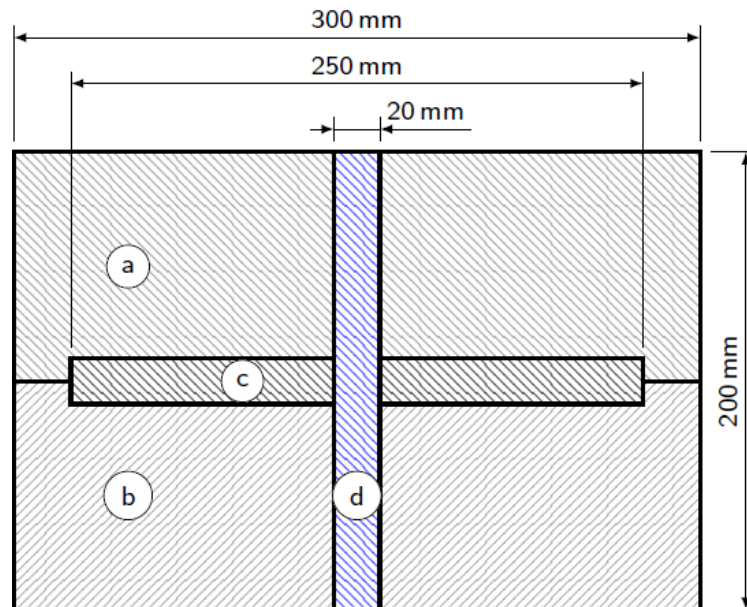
Schematic drawing of the joining partners (a and b) with indicated weld seam position (c) and tensile test specimen (d)
